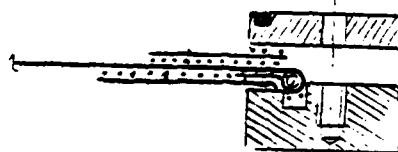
COMPRESSION FITTING CROSS SECTION
